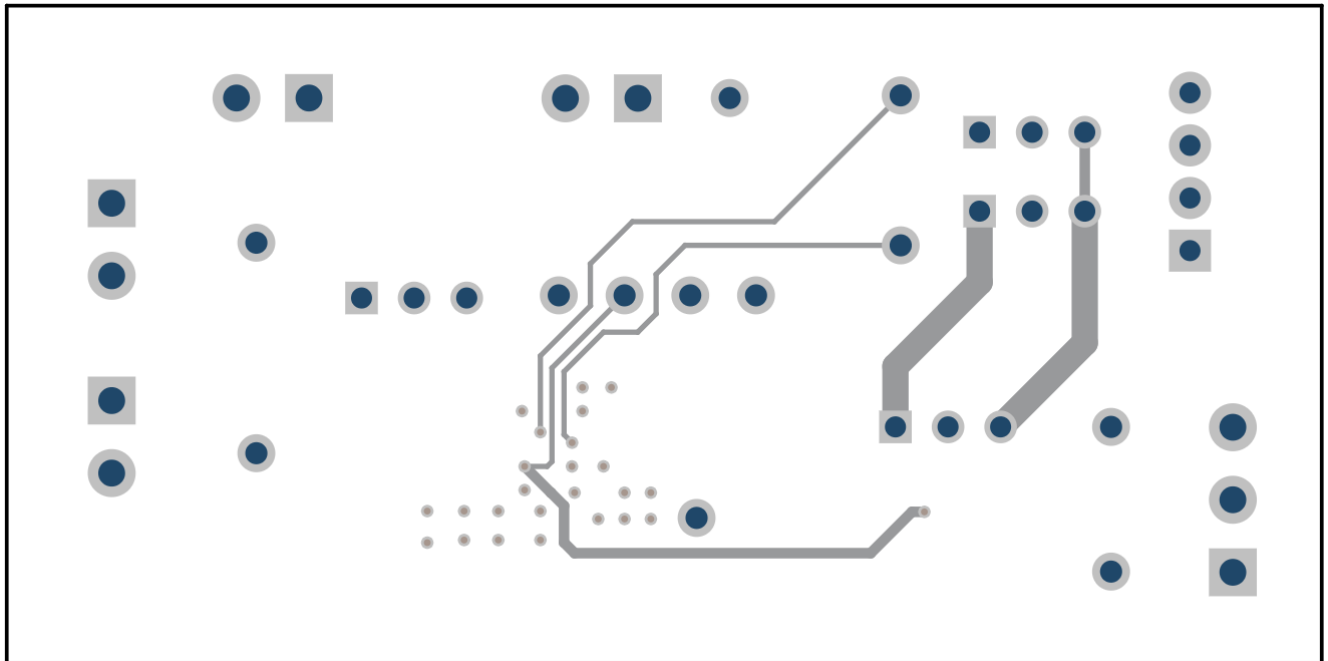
BQ27427EVM Layout – Bottom Layer
